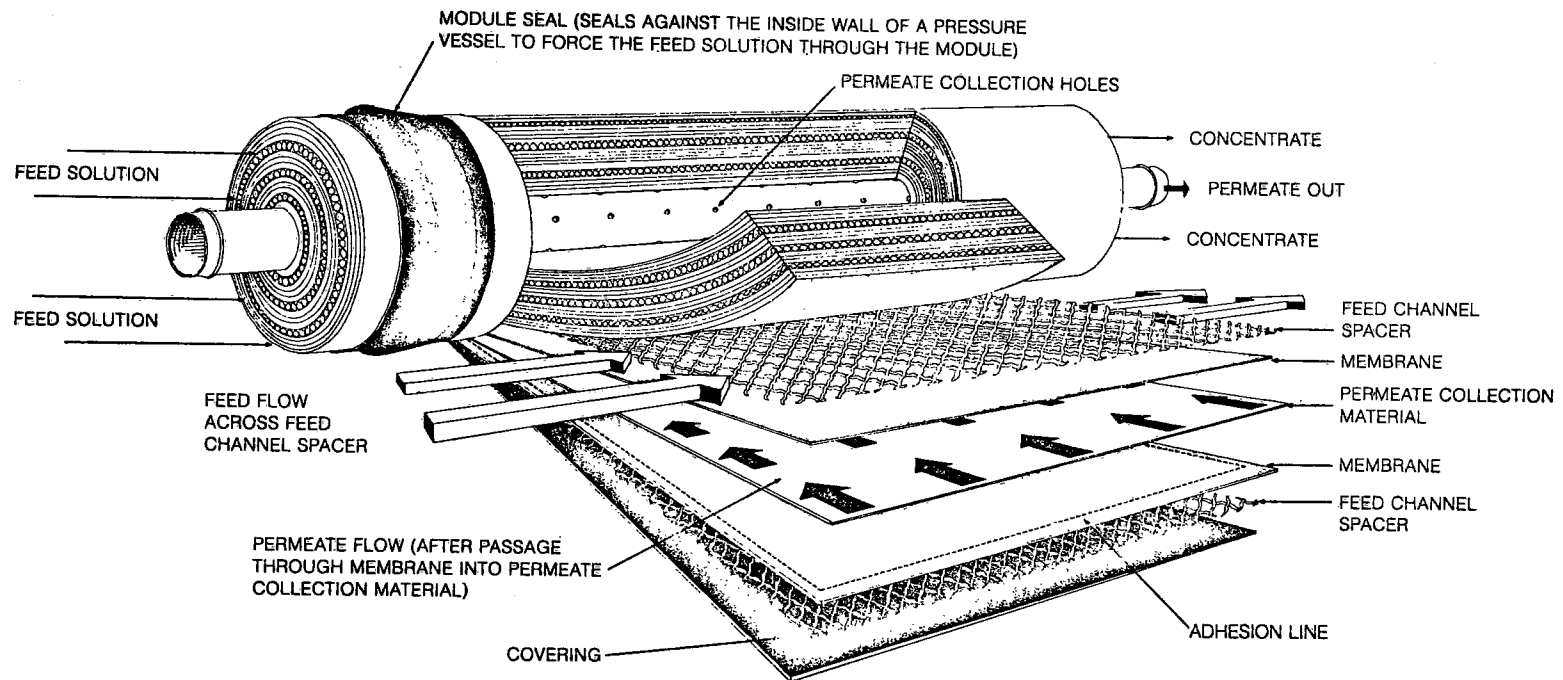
Cut-away view of spiral-wound ultrafiltration module .
